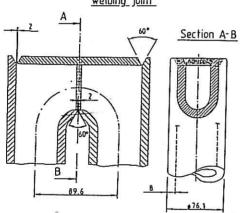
Wall panel in pipe-bar-pipe construction, vertically coiled with improved slag adherence
